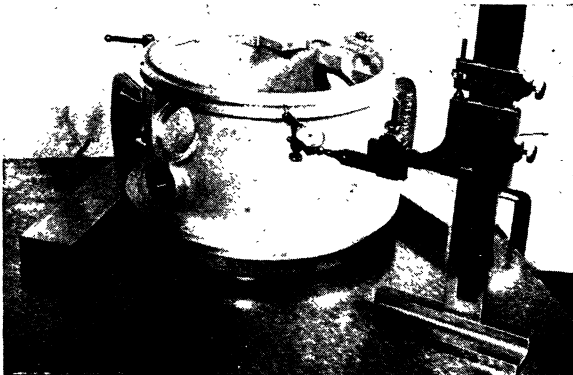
Large hollow piece being checked for concentricity of several large diameters.
